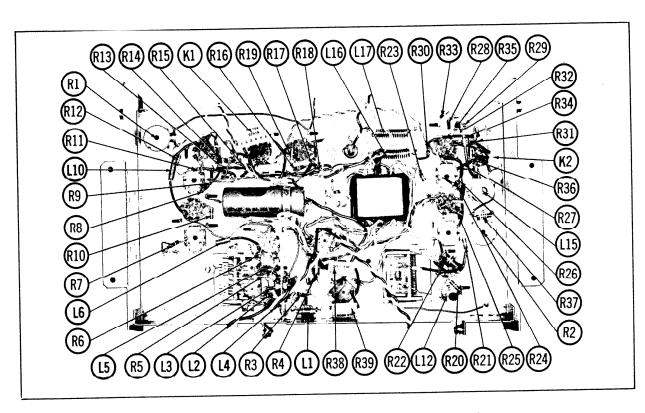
AM-FM Tuner - Bottom View, Resistor Identification.
